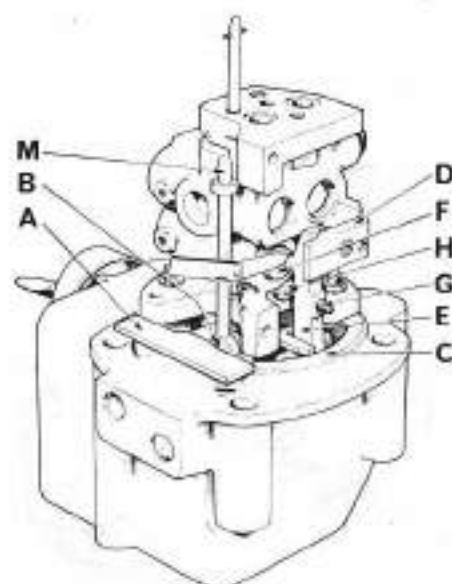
Using adjusting gage to check setting of abutment plate (D); refer to text for procedure.
